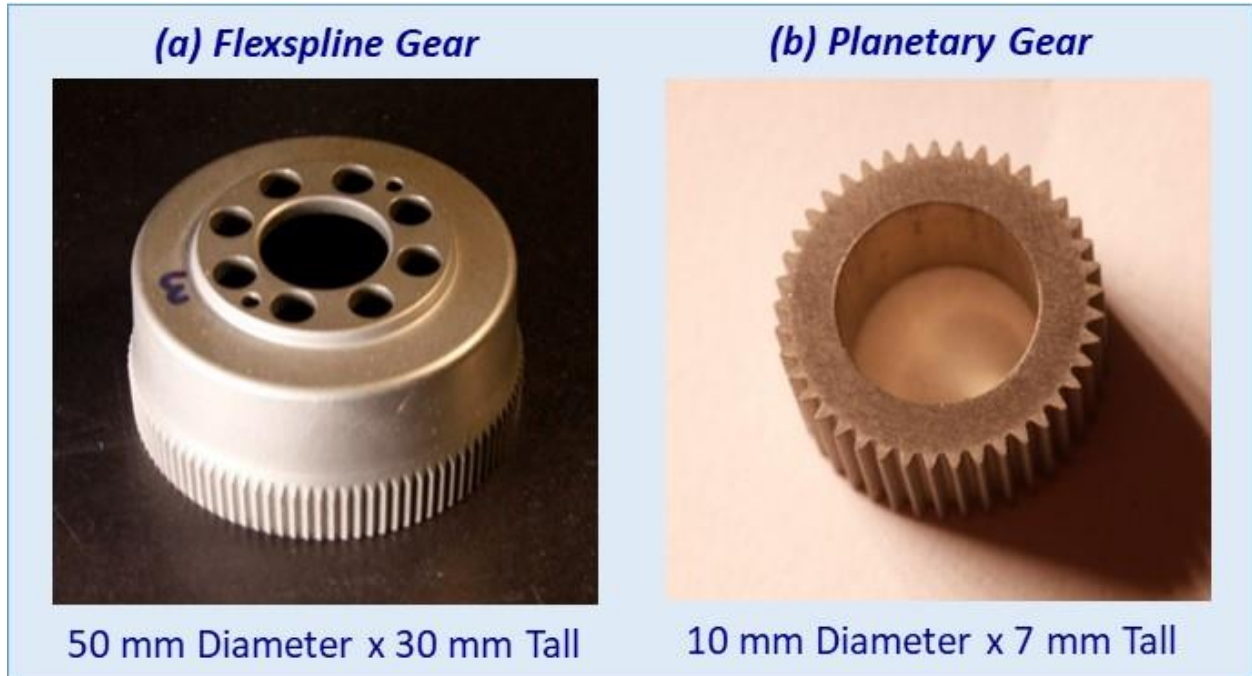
Prototype castings of BMG gear components: (a), flexspline gear; (b), planetary gear.
